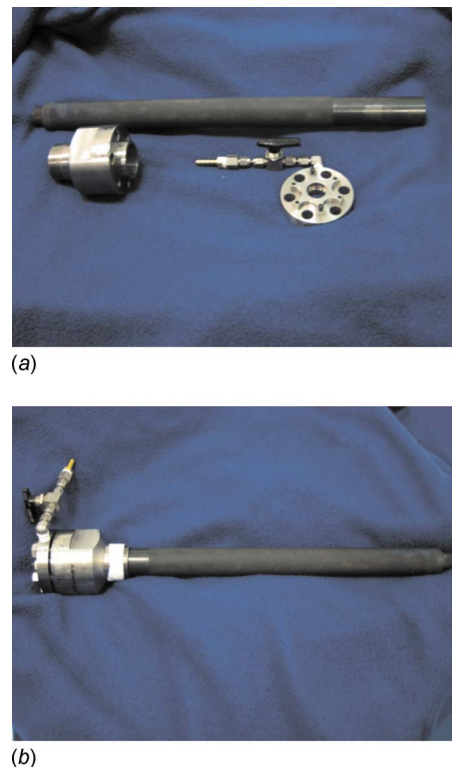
SiC temperature front-end probe shown in an (a) unassembled and (b) assembled fashion
